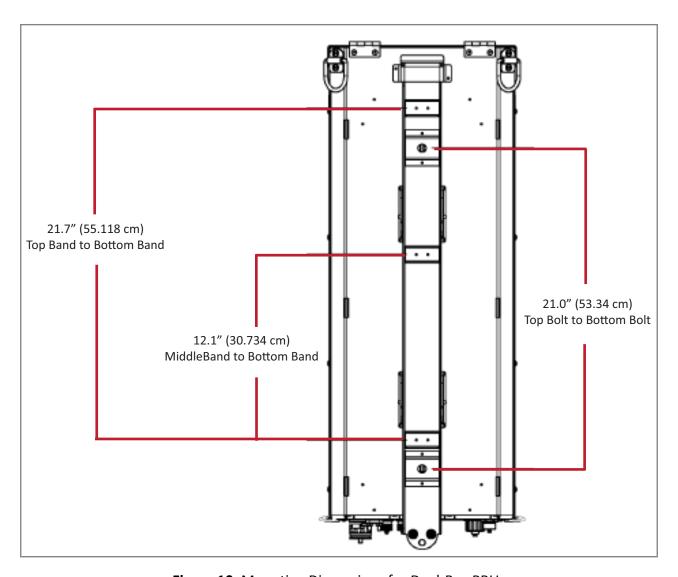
Mounting Dimensions for Dual-Bay PRUs
